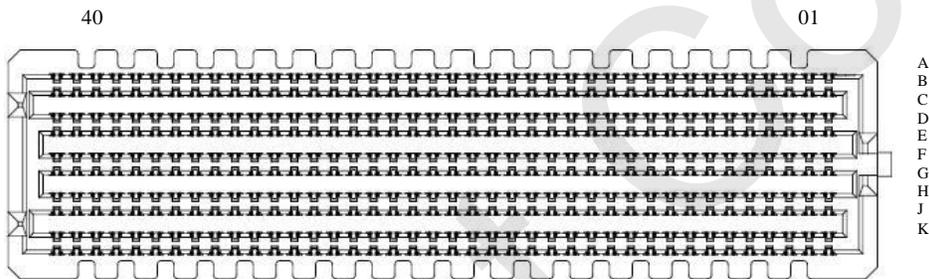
FMC Module Connector Grid Labeling (Component Side View)
